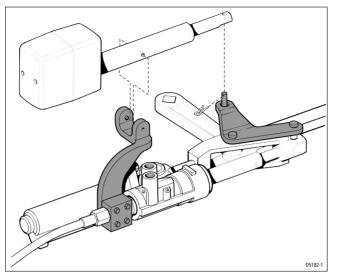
Fitting the I/O drive unit (Mercruiser 95)
